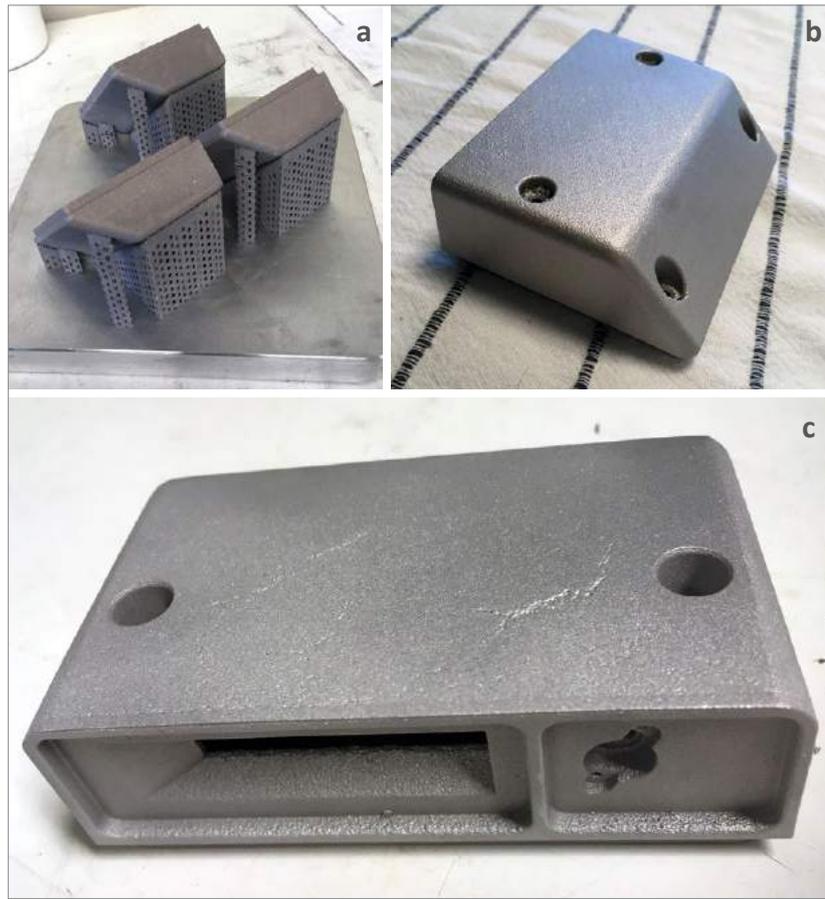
Image (a) shows the print orientation for the part in (b). The bottom surface did not crack, but it required a print time of 54 hours for the three parts. (c) shows the same part printed horizontally, which resulted in cracks in the bottom surface, however the print time was 22 hours for the three parts
